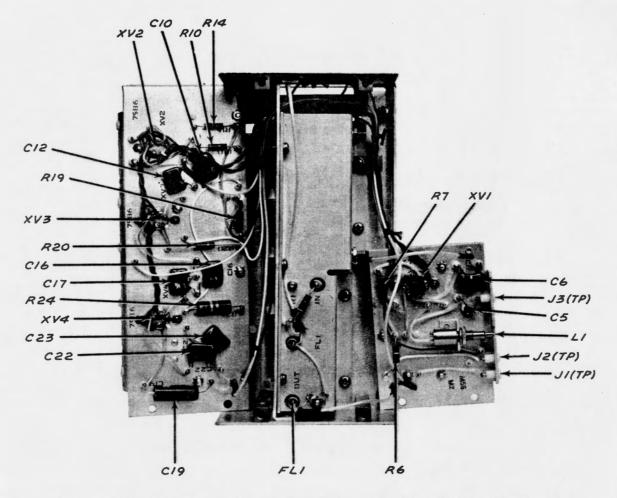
1st Injector A1A10, Parts Location and Test Points, Disassembled
